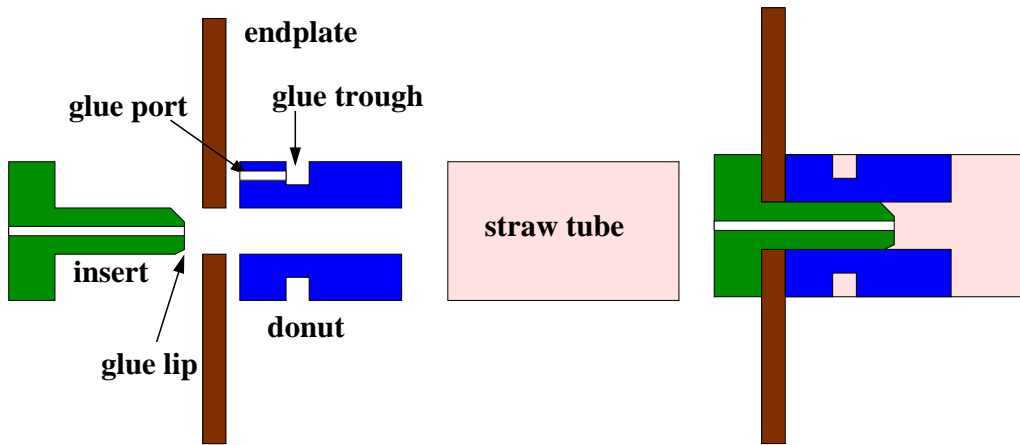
The CMU designed feed throughs which provide a solid glue joint between the straw-tube and the end plate. The left-hand figure shows an expanded view, while the right-hand shows the feed throughs in the chamber end plates.
